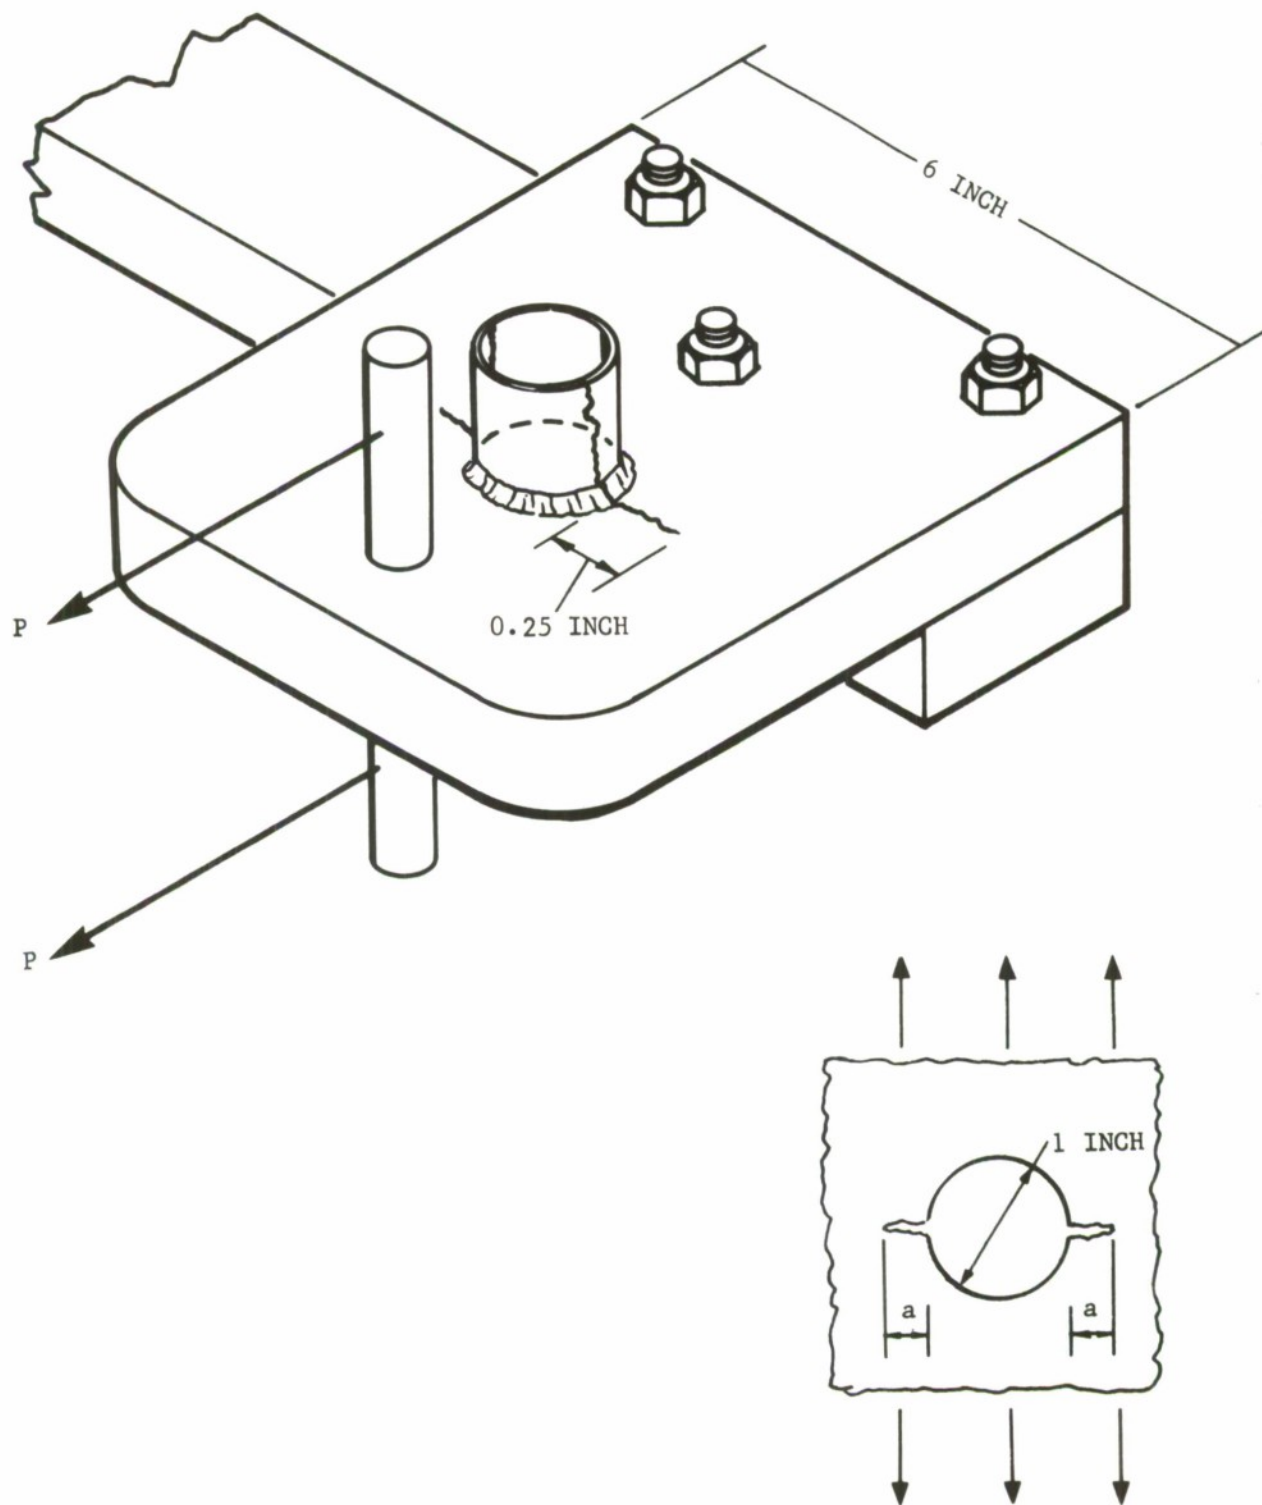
FEED THROUGH ARM WITH WELDED SUPPORT BASE
